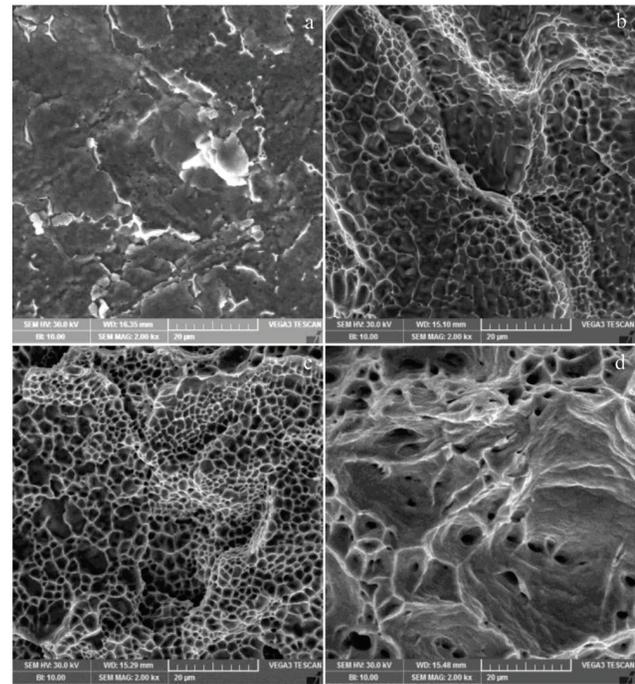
Fracture morphologies of the weld seam at different positions: (a) position A, (b) position B, (c) position C, and (d) position D
